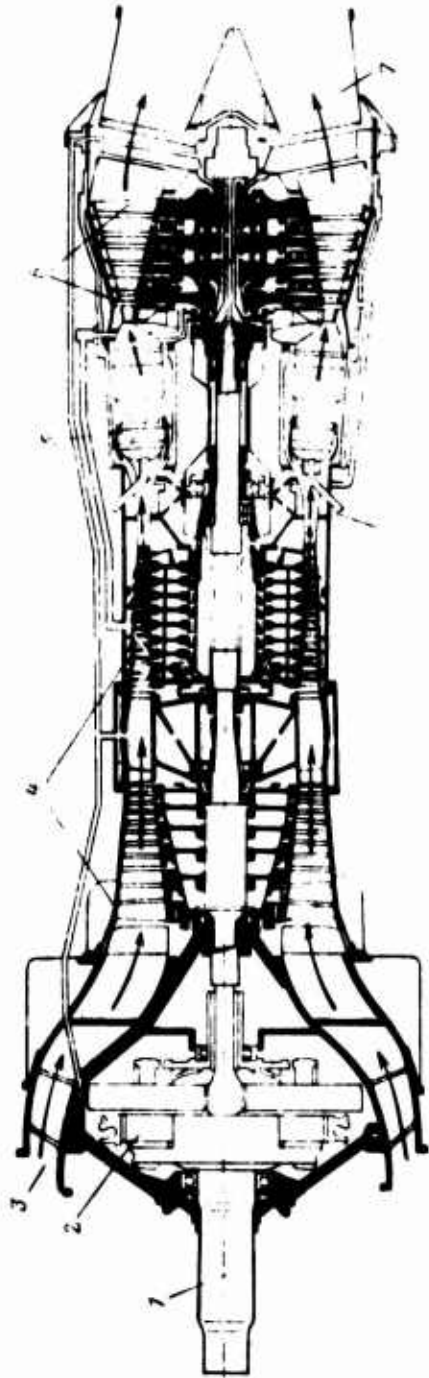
Diagram of a turboprop engine (TVD): 1 - shaft of propeller; 2 - reduction gear; 3 - intake; 4 - compressor; 5 - combustion chamber; 6 - multi-stage turbine; 7 - exhaust.
